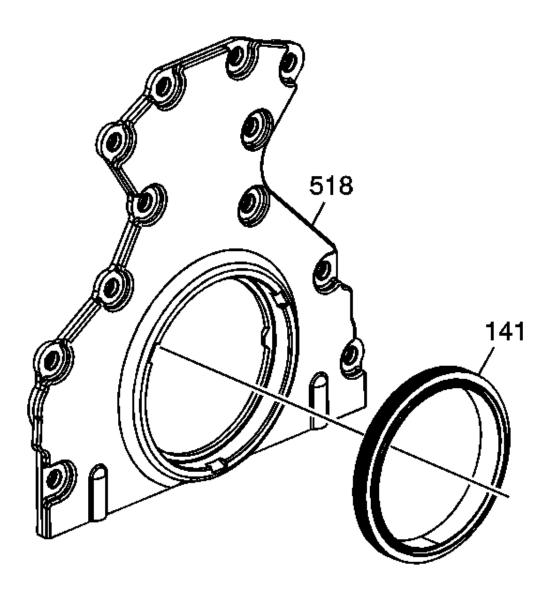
Crankshaft Rear Oil Seal & Housing Courtesy of GENERAL MOTORS CORP.
